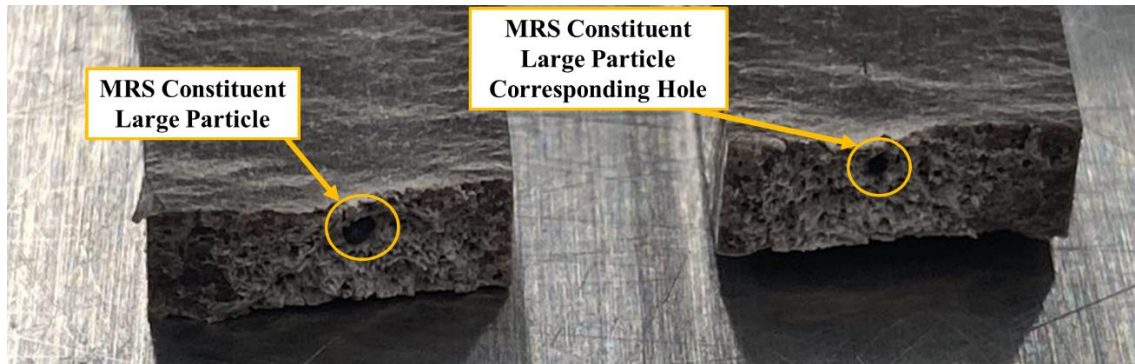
Injection Molded MSC-40C Tested Tensile Fracture Surface View One
